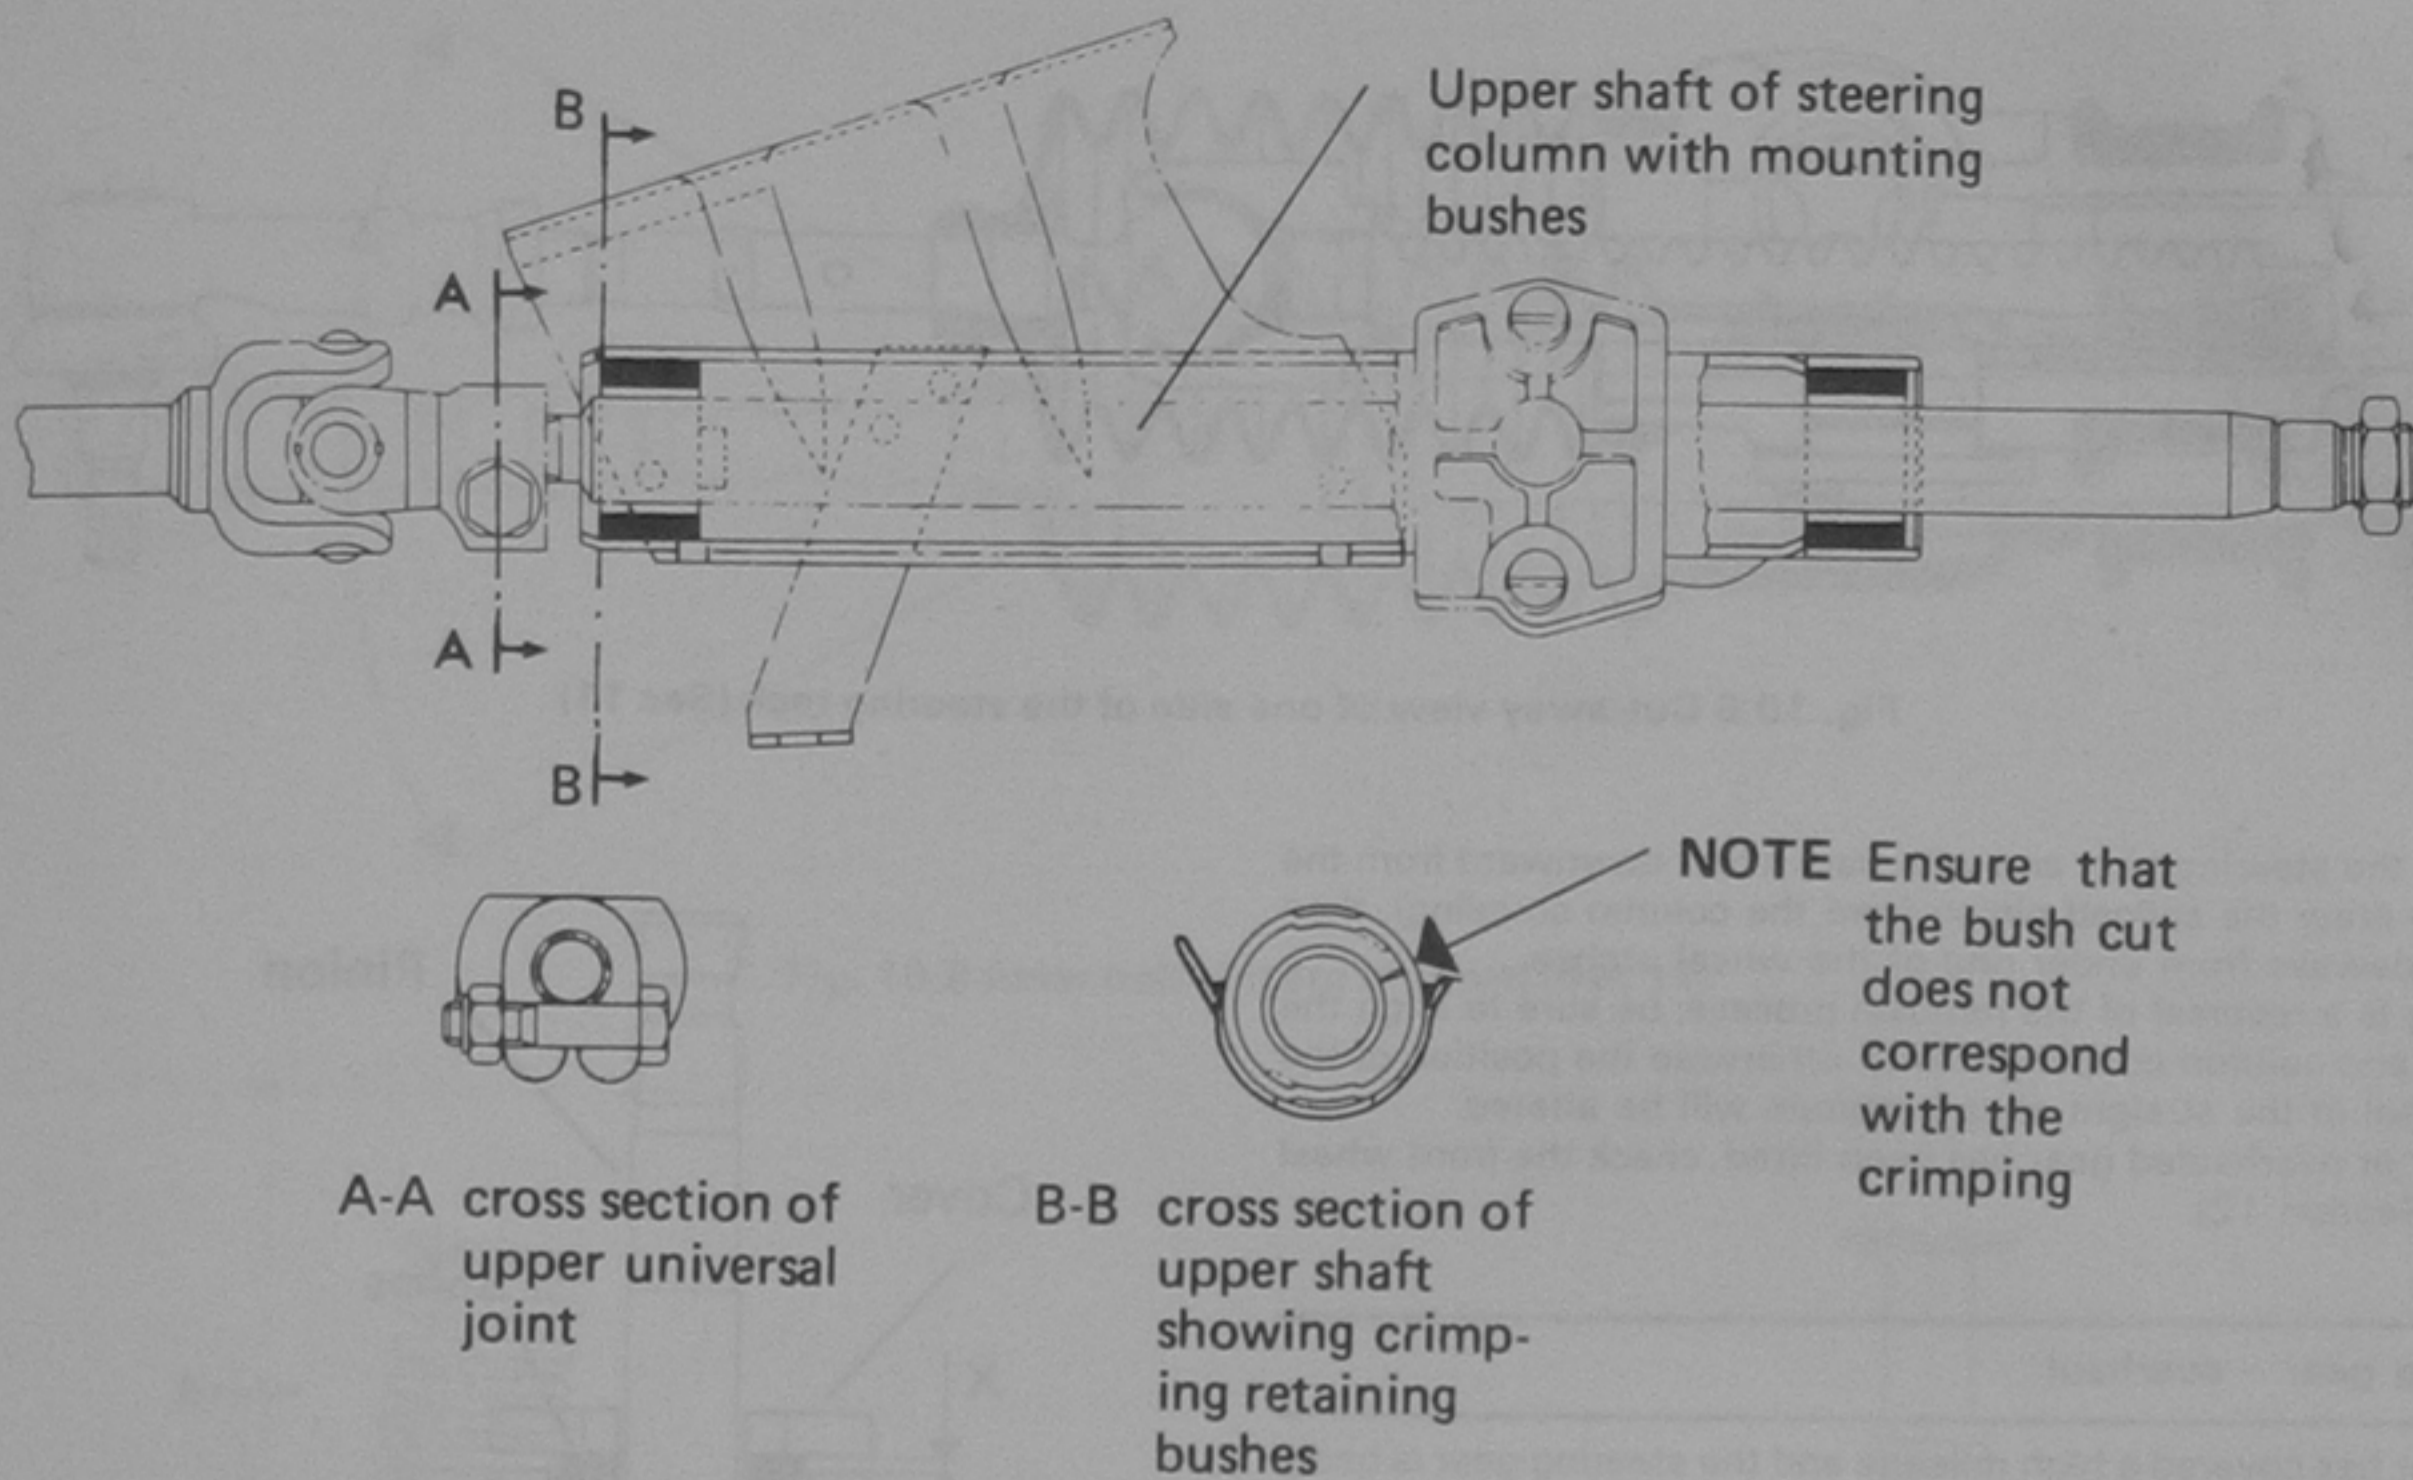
Sectional view of steering column showing bushes (Sec 8)
